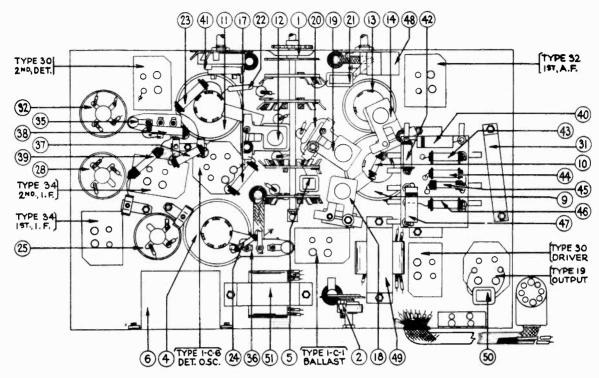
Bottom View of Chassis, Showing Parts, and Position of Compensating Condensers Reached from Below Chassis
